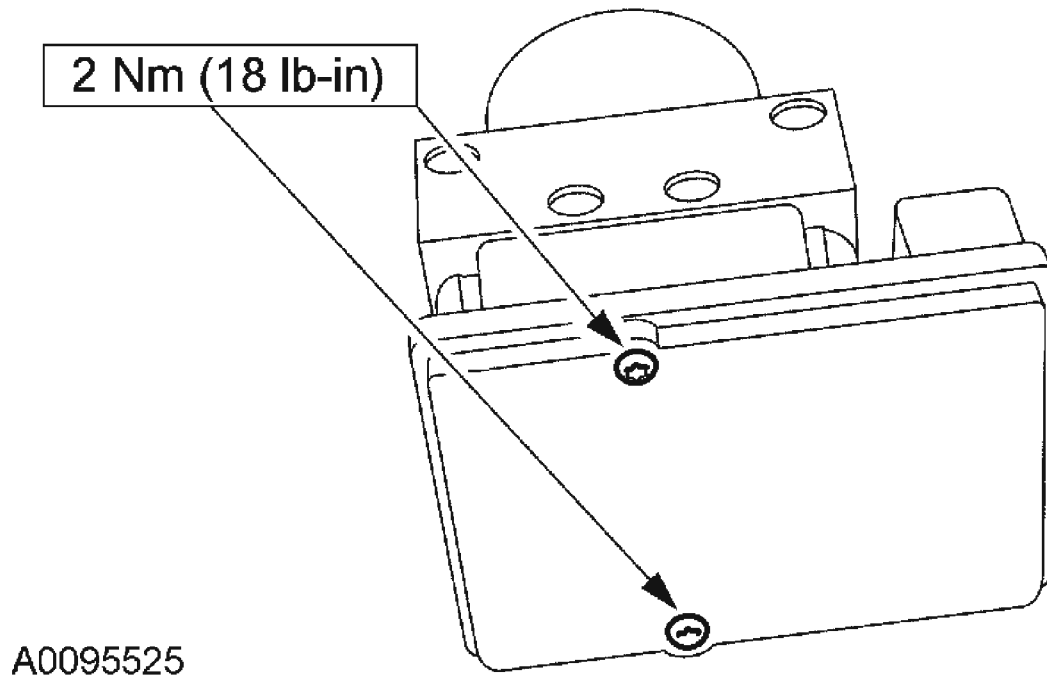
Removing ABS Module To HCU Retaining Bolts
